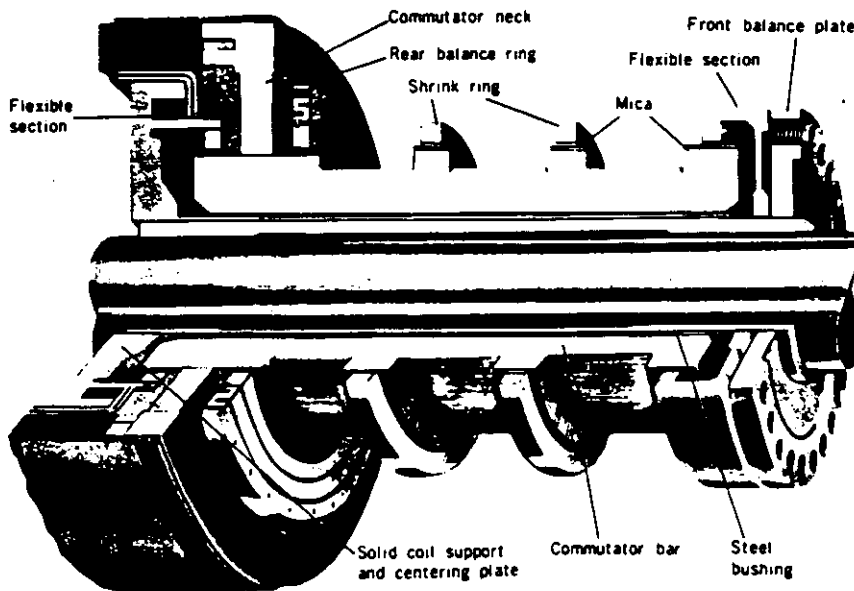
Shrink-ring type commutator for shaft driven direct-connected exciter
